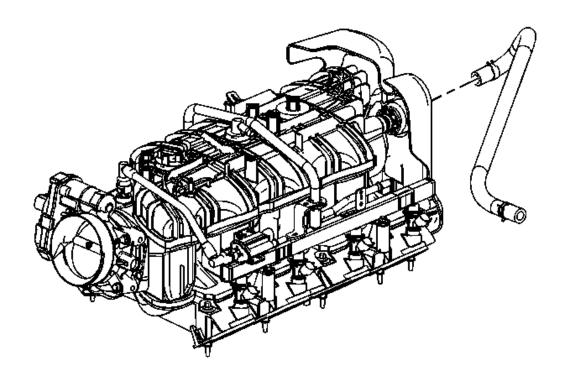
View Of Vacuum Brake Booster Hose Courtesy of GENERAL MOTORS CORP.
